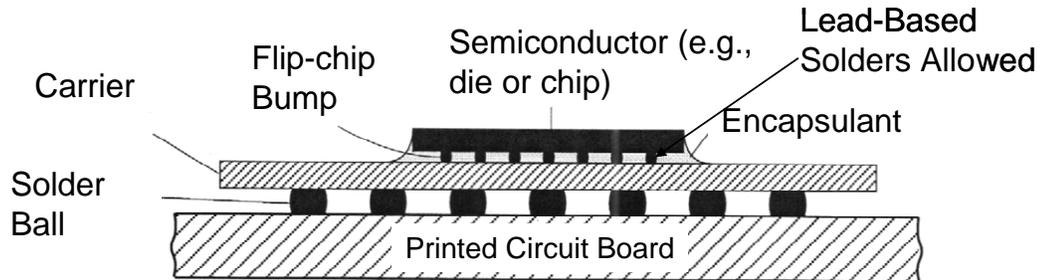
Schematic of a flip-chip package mounted to a printed circuit board
